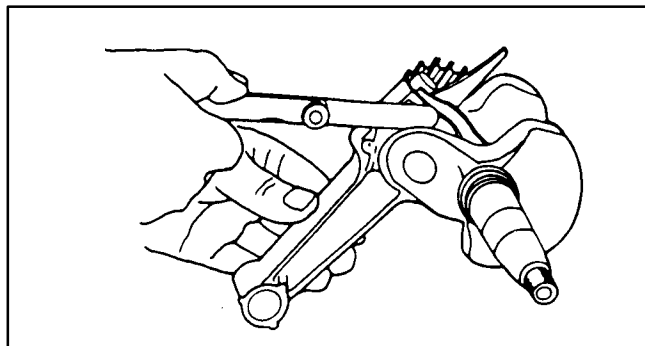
SIDE CLEARANCE OF CONNECTING ROD ON CRANK PIN
